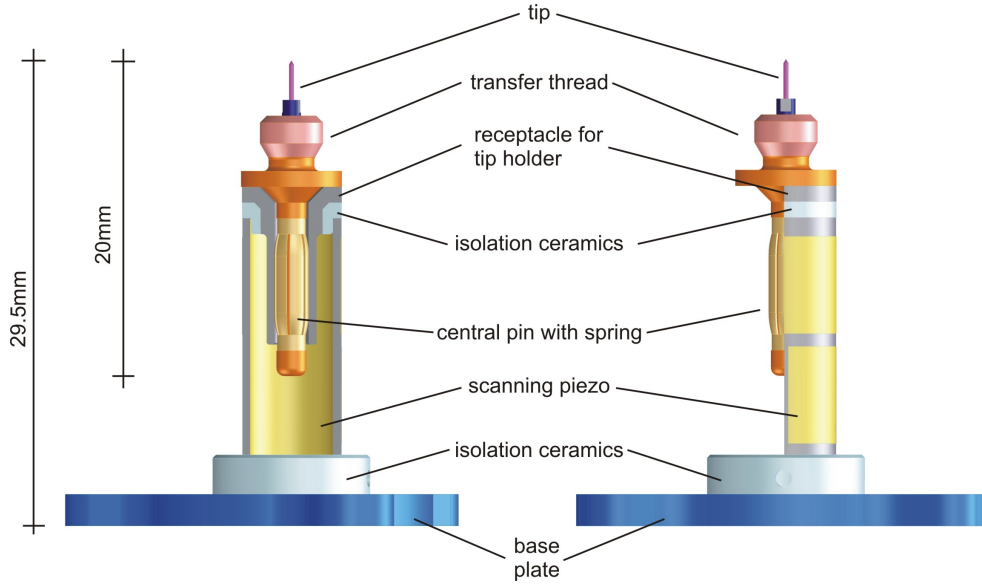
Tip assembly. The scanning piezo is attached to the base plate. It carries the receptacle into which the tip holder is inserted. The whole tip assembly is mounted to the attocube coarse motor.
